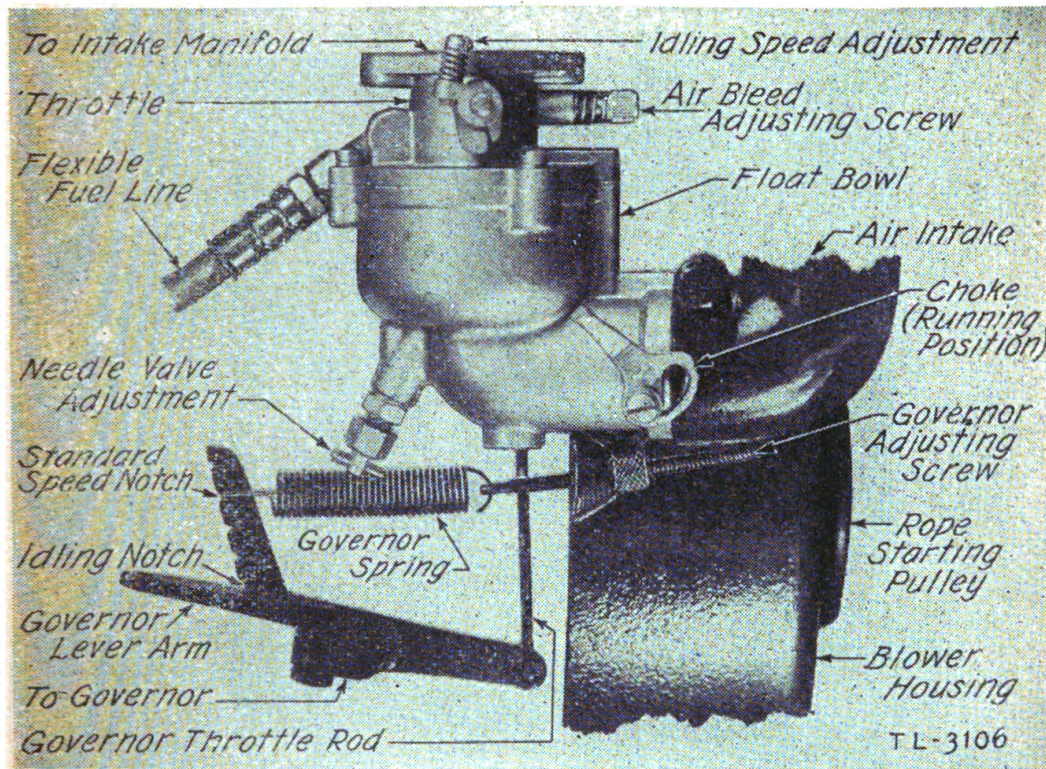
Power unit PE-49-C governor and carburetor assembly (partial view).
